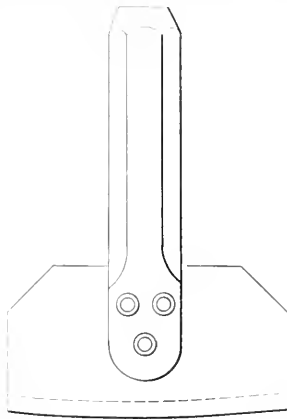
Type of Tool used to set the Finished Dummy Strips in the Gland Case
